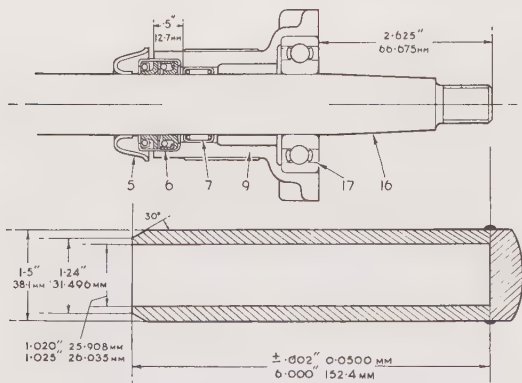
11 Details of hub bearings, and hollow drift for refitting oil flinger to axleshaft.
